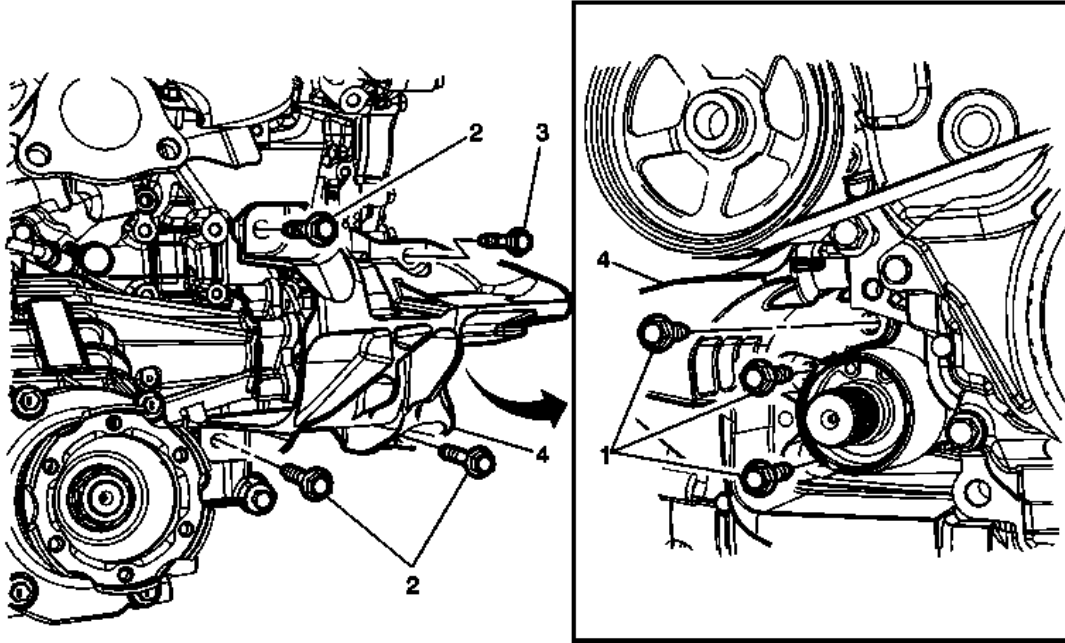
Engine Mount Bracket & Components (All Wheel Drive)
